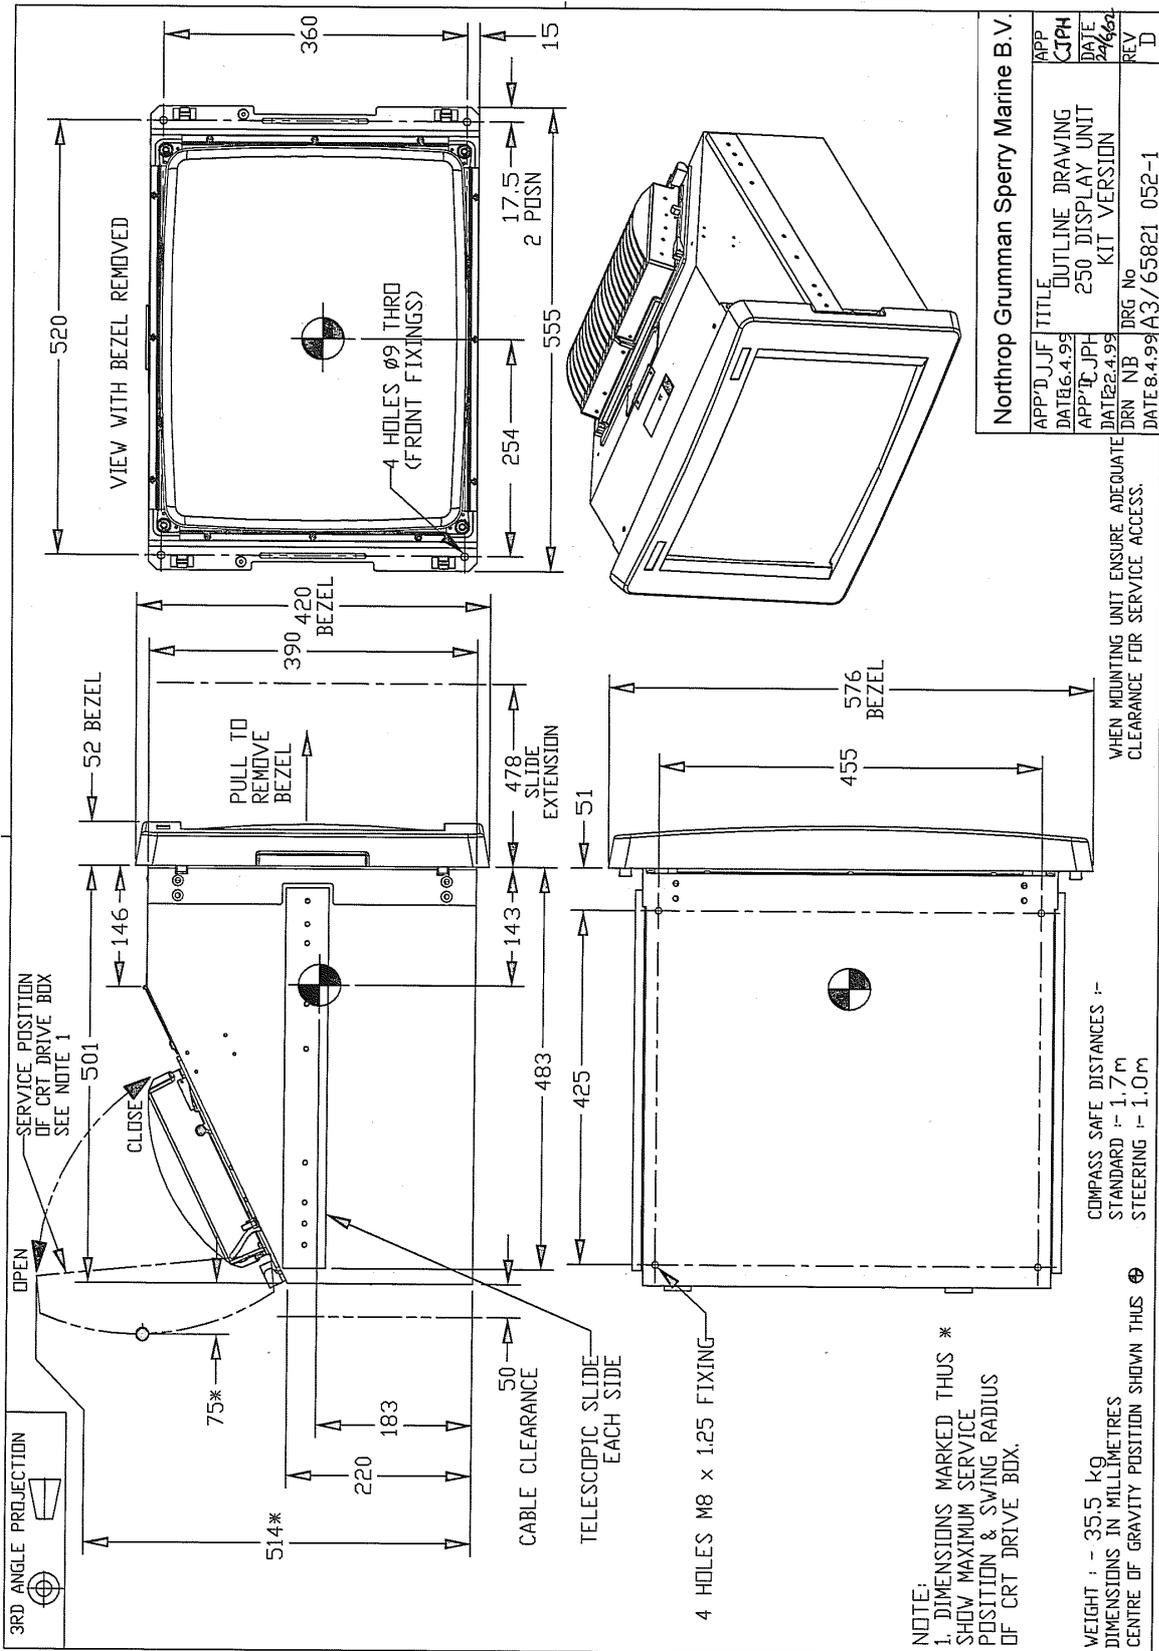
250 Monitor Module (CRT) Outline Drawing
